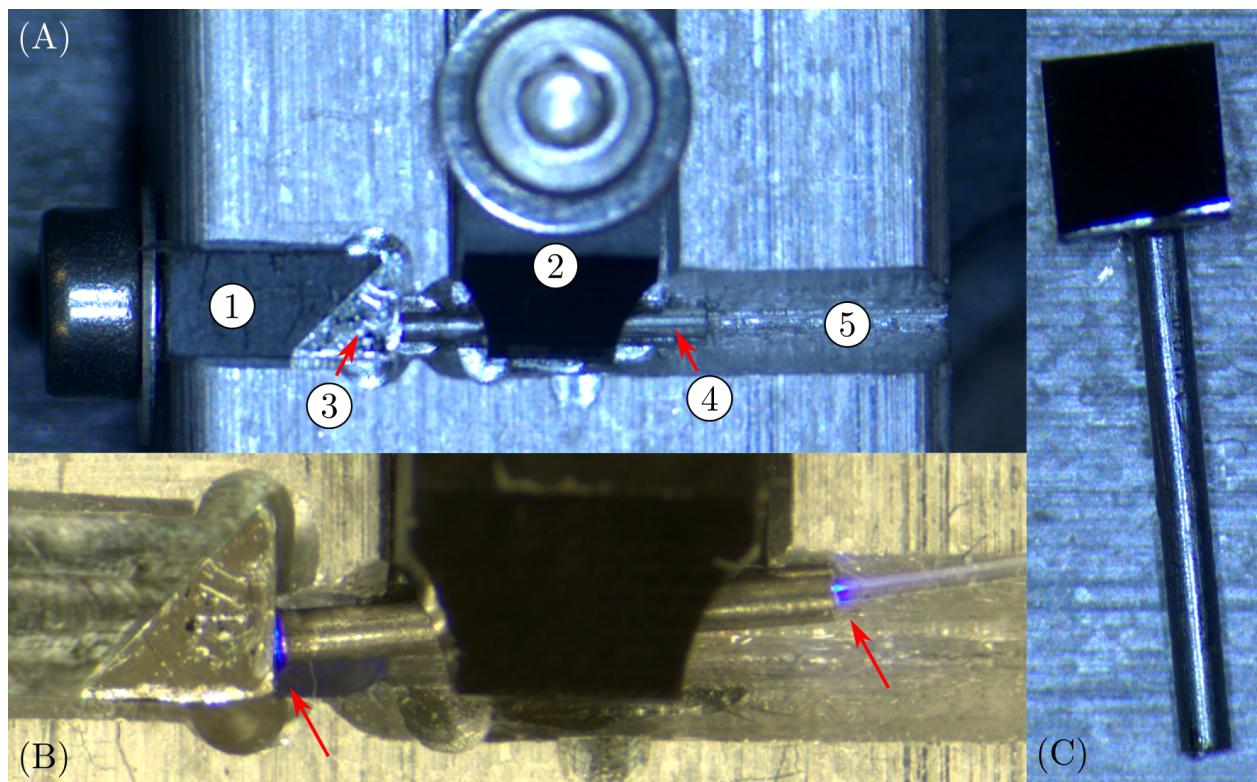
Motor shaft alignment tool & assembled prism and rod. (A) Loaded alignment tool with prism clamp (1), rod clamp (2), prism (3), hollow rod (4), and rod alignment groove (5). (B) Glued prism and rod assembly. Red arrows highlight the blue fluorescence of the UV-curing glue. (C) Final assembly to be inserted into the micromotor. All scale bars are 1 mm.
